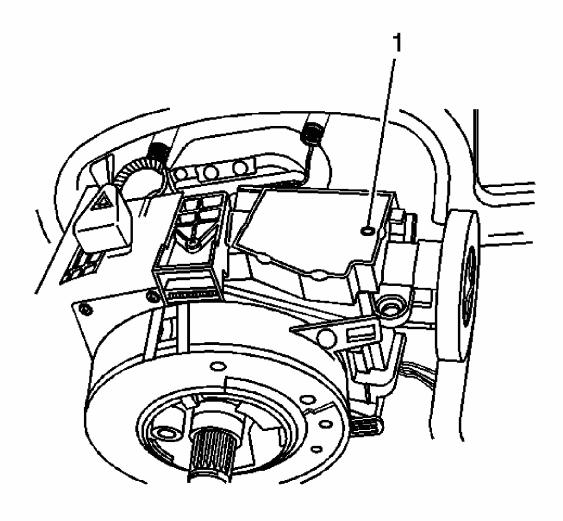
Locating Lock Cylinder Access Hole Courtesy of GENERAL MOTORS CORP.
